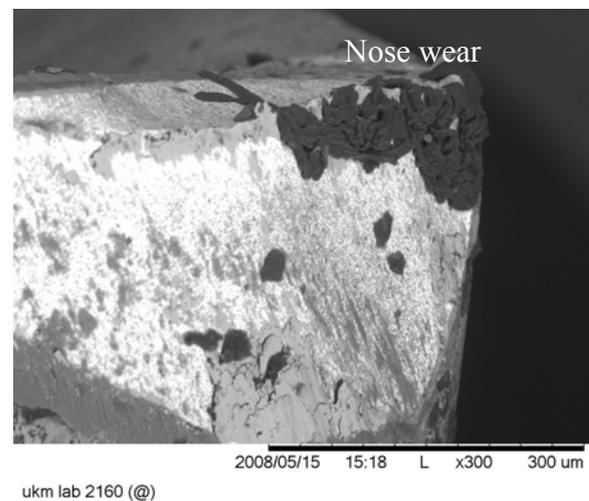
Wear on the flank face when machining at cutting speed of 180 m/min, feed rate of 0.1 mm/tooth and depth of cut of 0.3 mm
